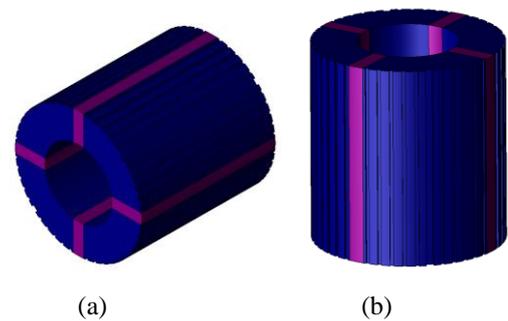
Notching rotor model a) Isometric view b) Rotor top view
